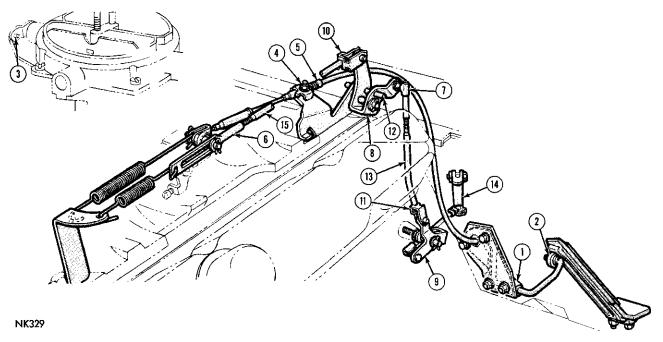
Throttle Linkage Adjustment—AC-1, AC-2, AC-3 with 383 or 413 Cu. In. Engine
